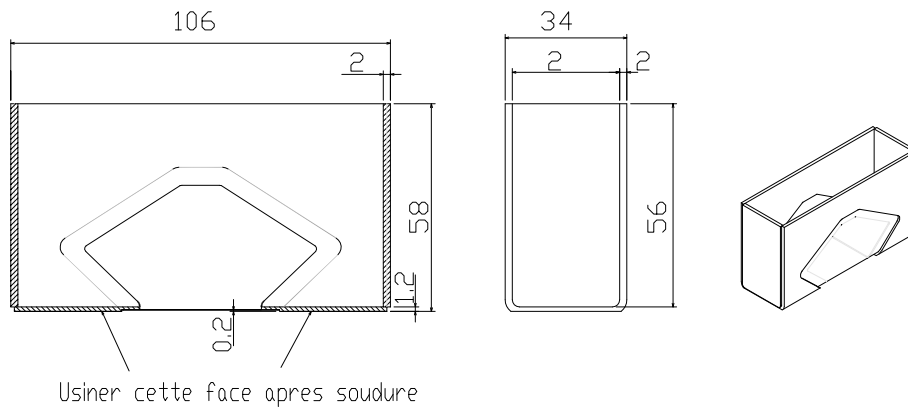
Protruded box after folding and welding of the the sheet and the window
